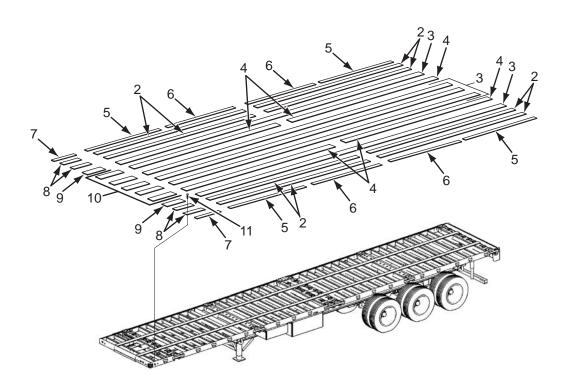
PLATFORM ASSEMBLY FLOORBOARDS
